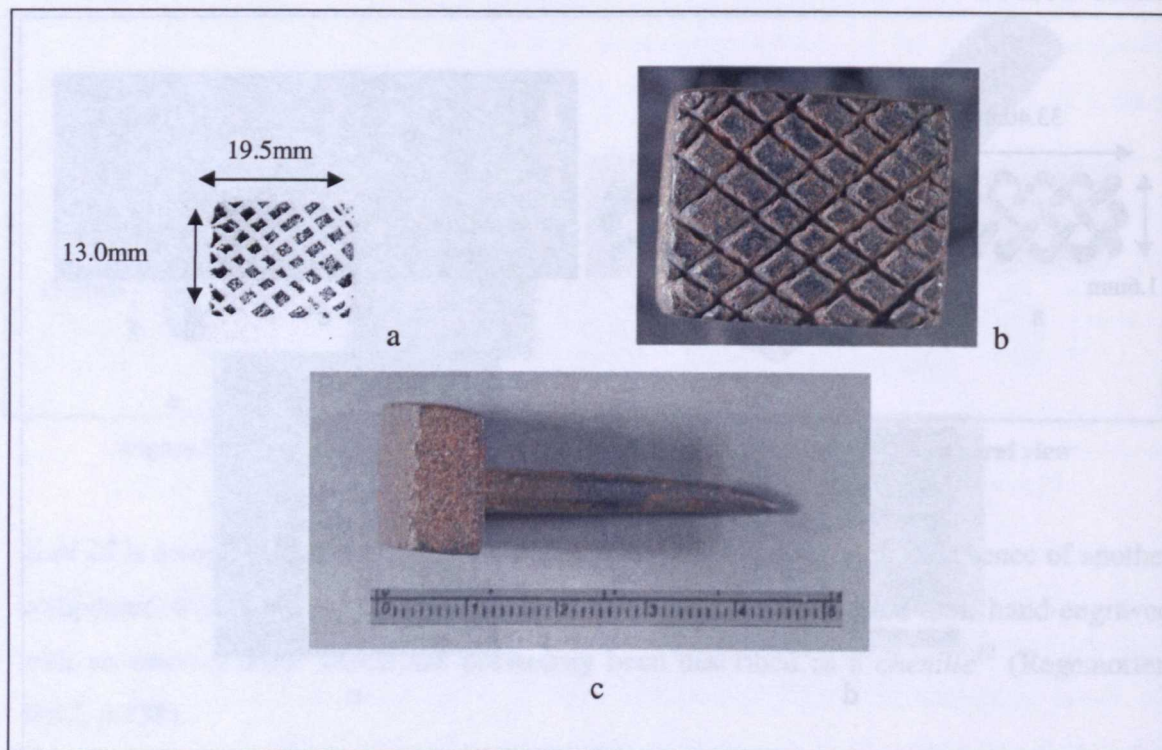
Tool 17: a) actual size smoke proof, b) photograph of face, c) side view,
